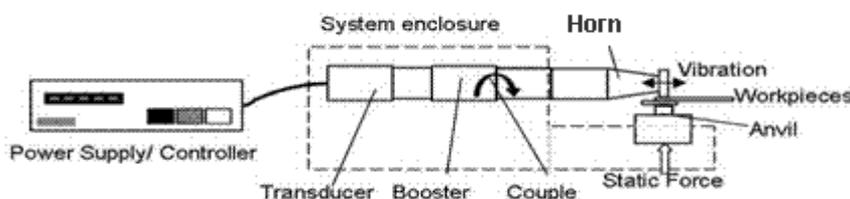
Mechanism of Ultrasonic metal welding [3]
